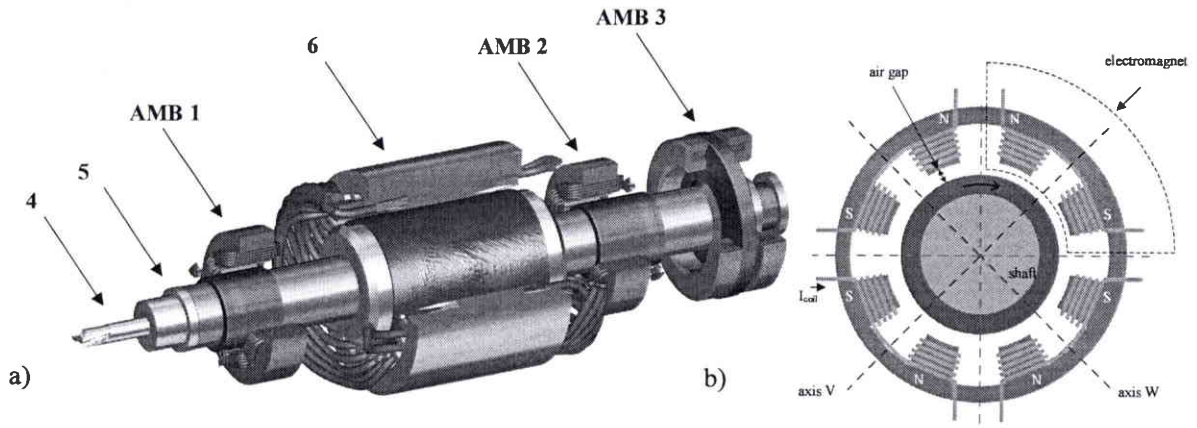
a - view of the milling spindle developed by S2M, b - main axes of a magnetic bearing
